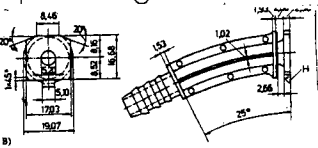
The pipe shown (A) has a curved bore as shown in drawing (B)
